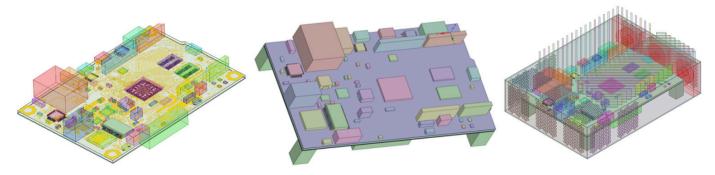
PCBA Geometry from Sherlock (top left) and PCBA after Housing is added in Spaceclaim.
